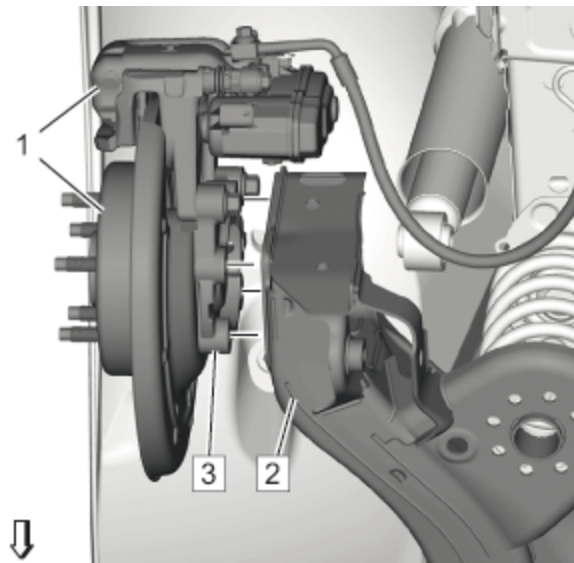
Rear Brake Assemblies, Rear Axle And Rear Wheel Bearing Hubs
